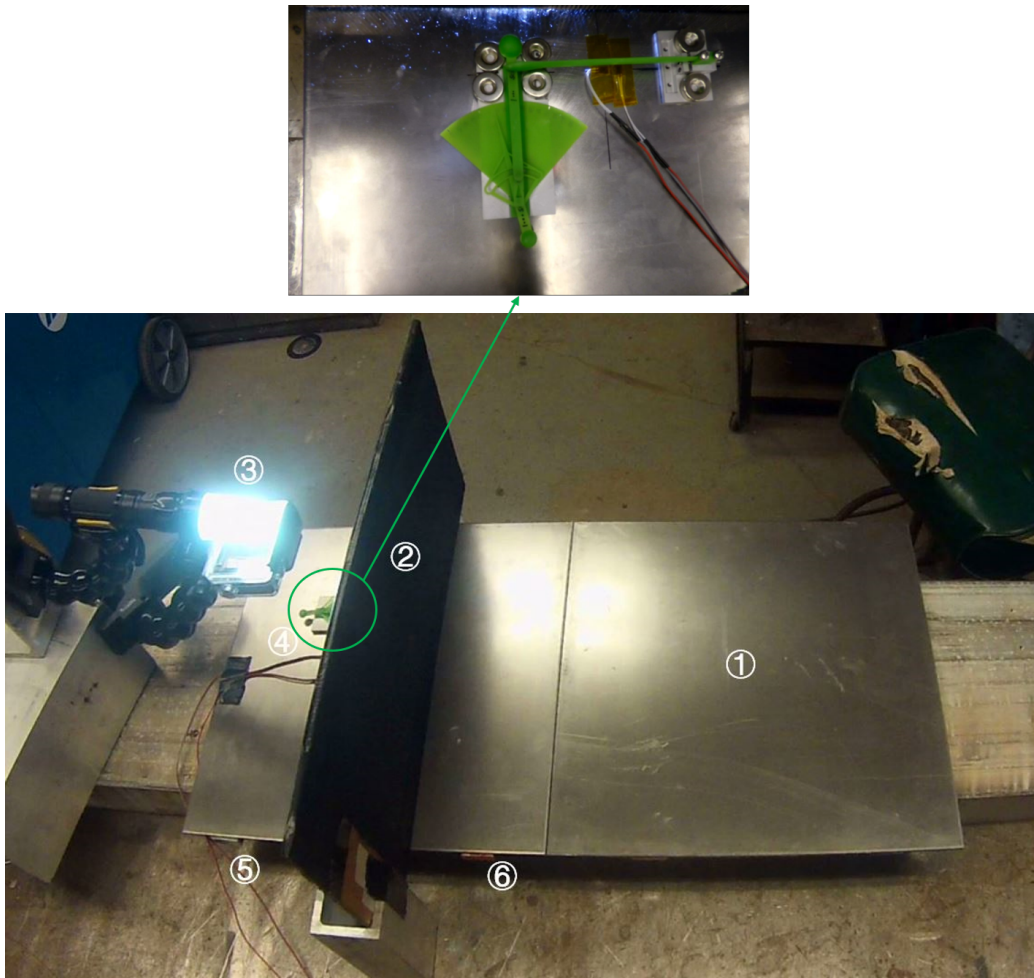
Welding preparation (① Steel Plate ② Protection Wall ③ Light and Camera ④ SAS ⑤ Aluminum Bar ⑥ Copper Bar)
